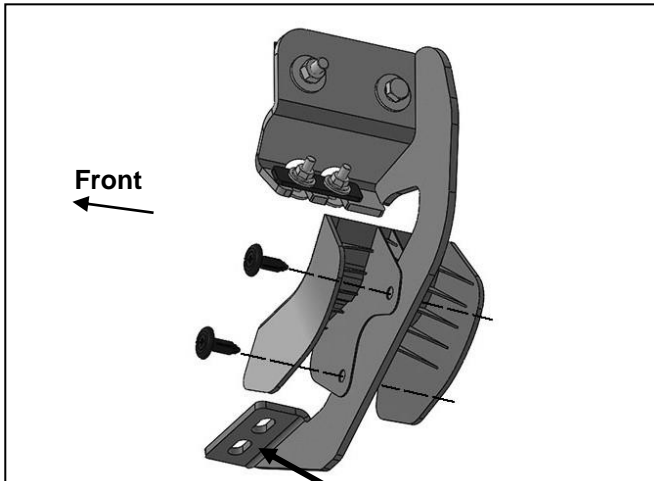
Passenger/right Front Mounting Bracket illustrated for models with threaded inserts
